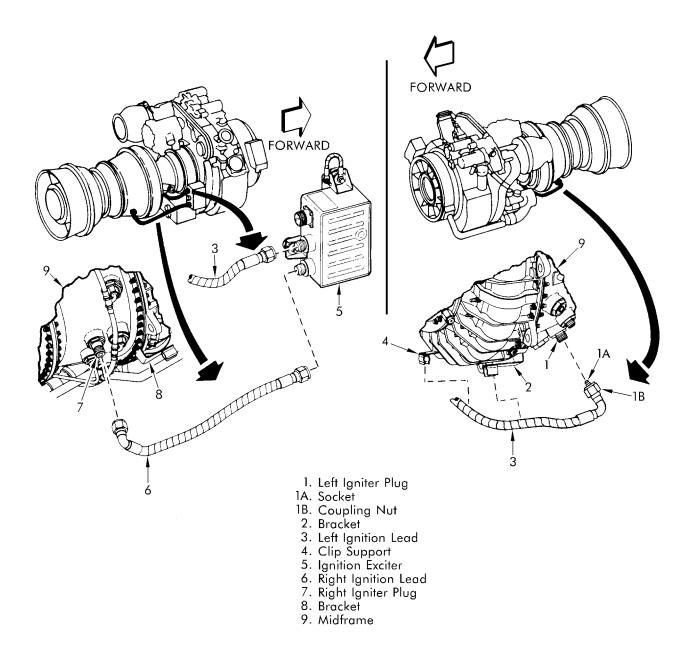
Electrical Ignition Leads; Removal and Installation
